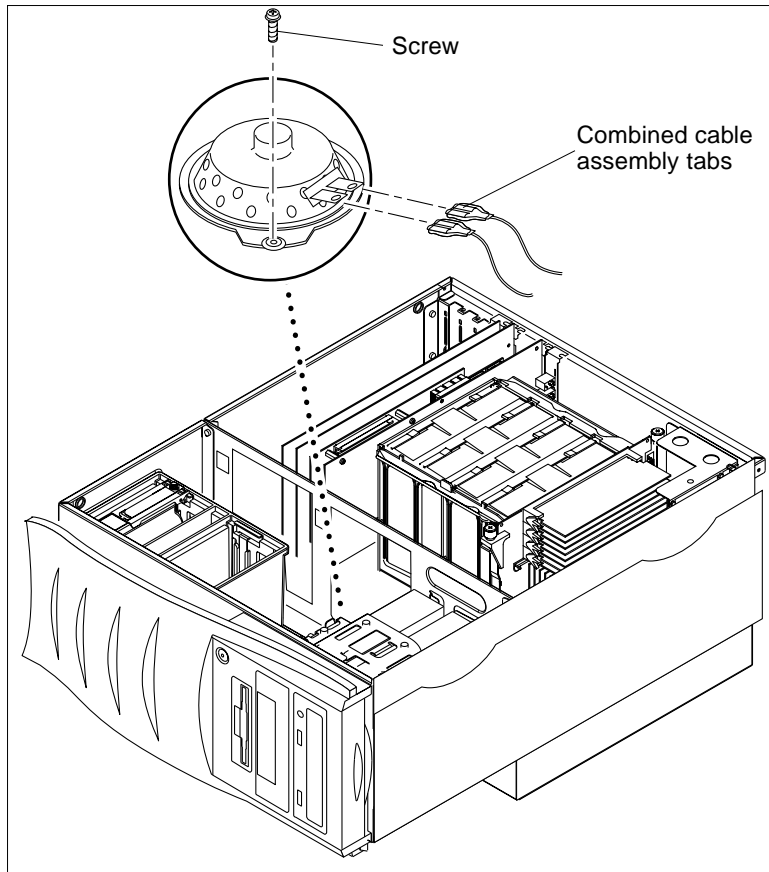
Removing and Replacing the Speaker Assembly
